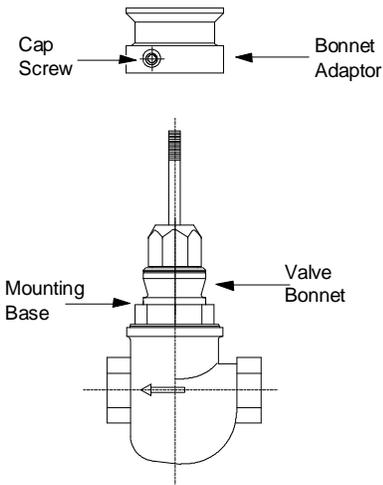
Exploded View of Mounting Kit Assembly to a Honeywell Valve
